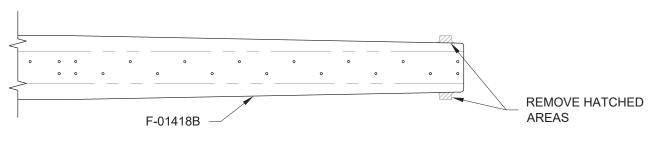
MODIFY AFT FUSE LONGERONS (SHOWN FLAT)
